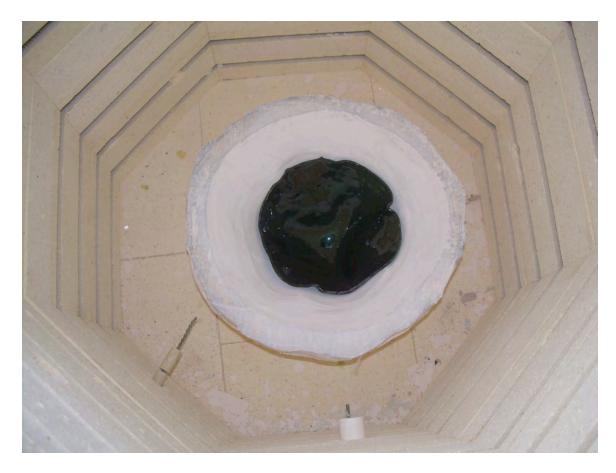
Glass slumped inside of plaster mold after it's fired inside the klin.
